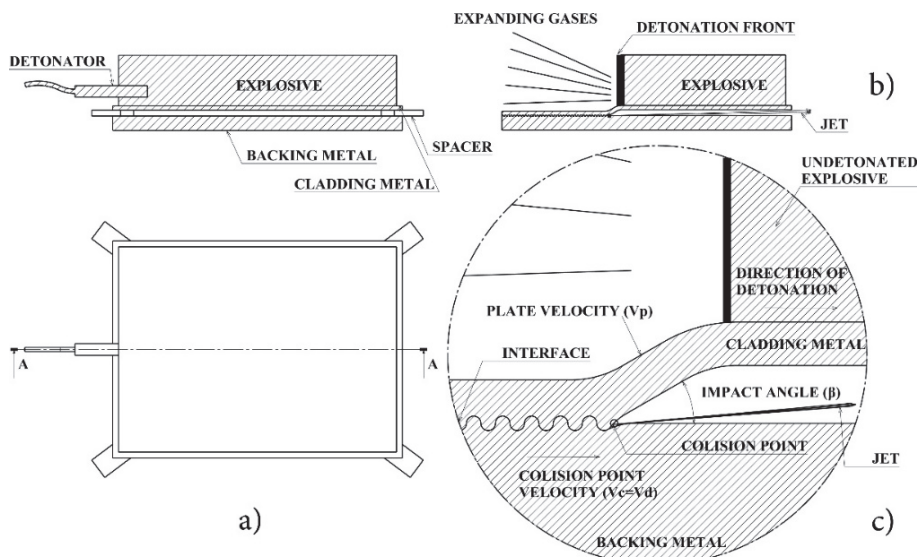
Experimental setting of explosive welding, parallel configuration. a) experimental setup, b) experimental setup at the time of the explosion, c) increase view [38]
